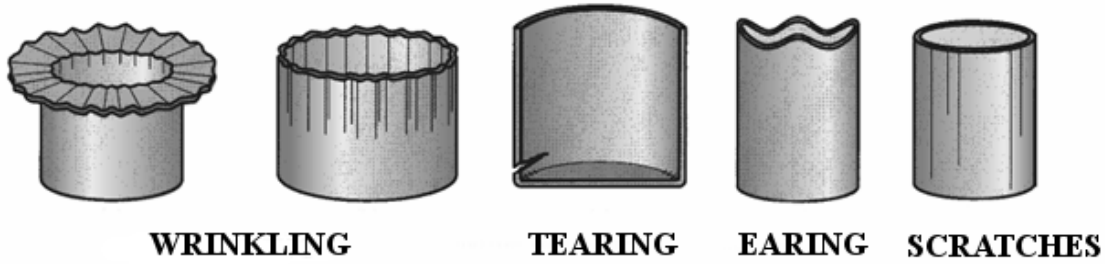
Common defects in deep drawn parts [7]
